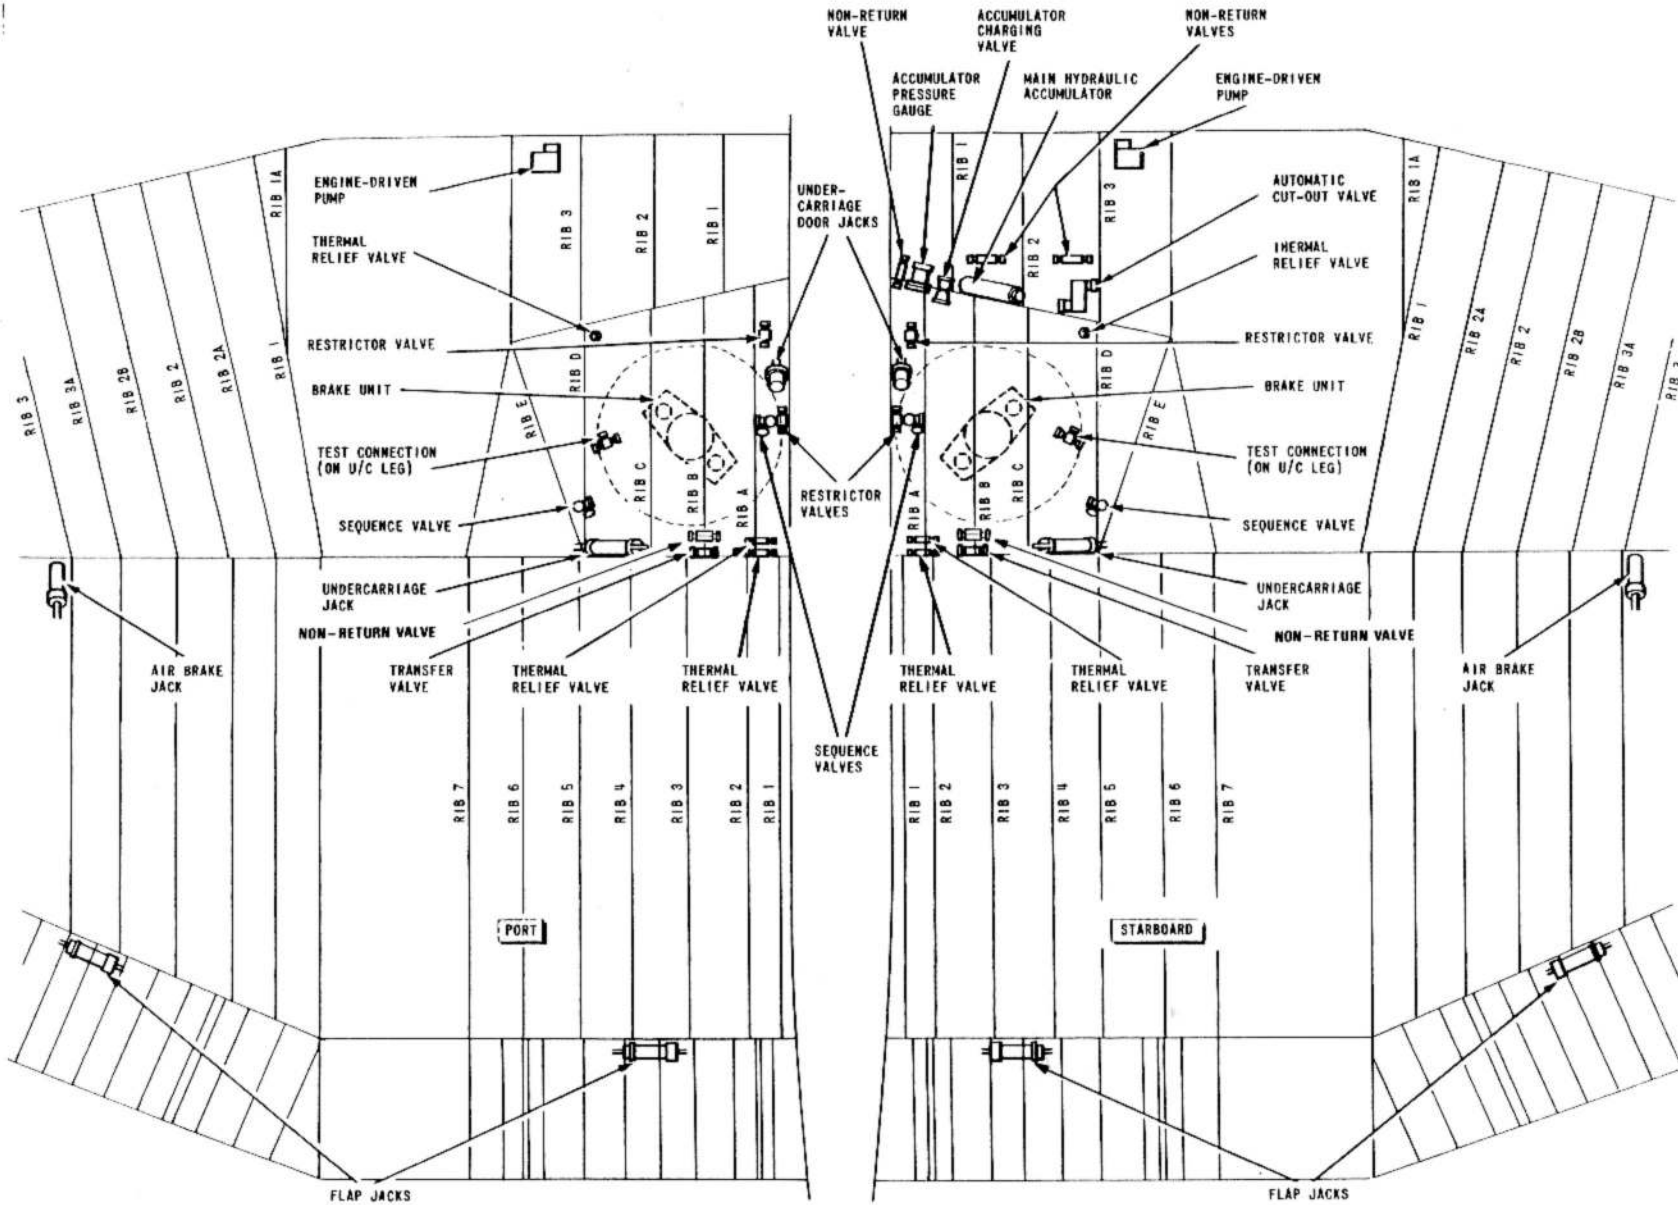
LOCATION OF HYDRAULIC COMPONENTS IN MAIN PLANES
